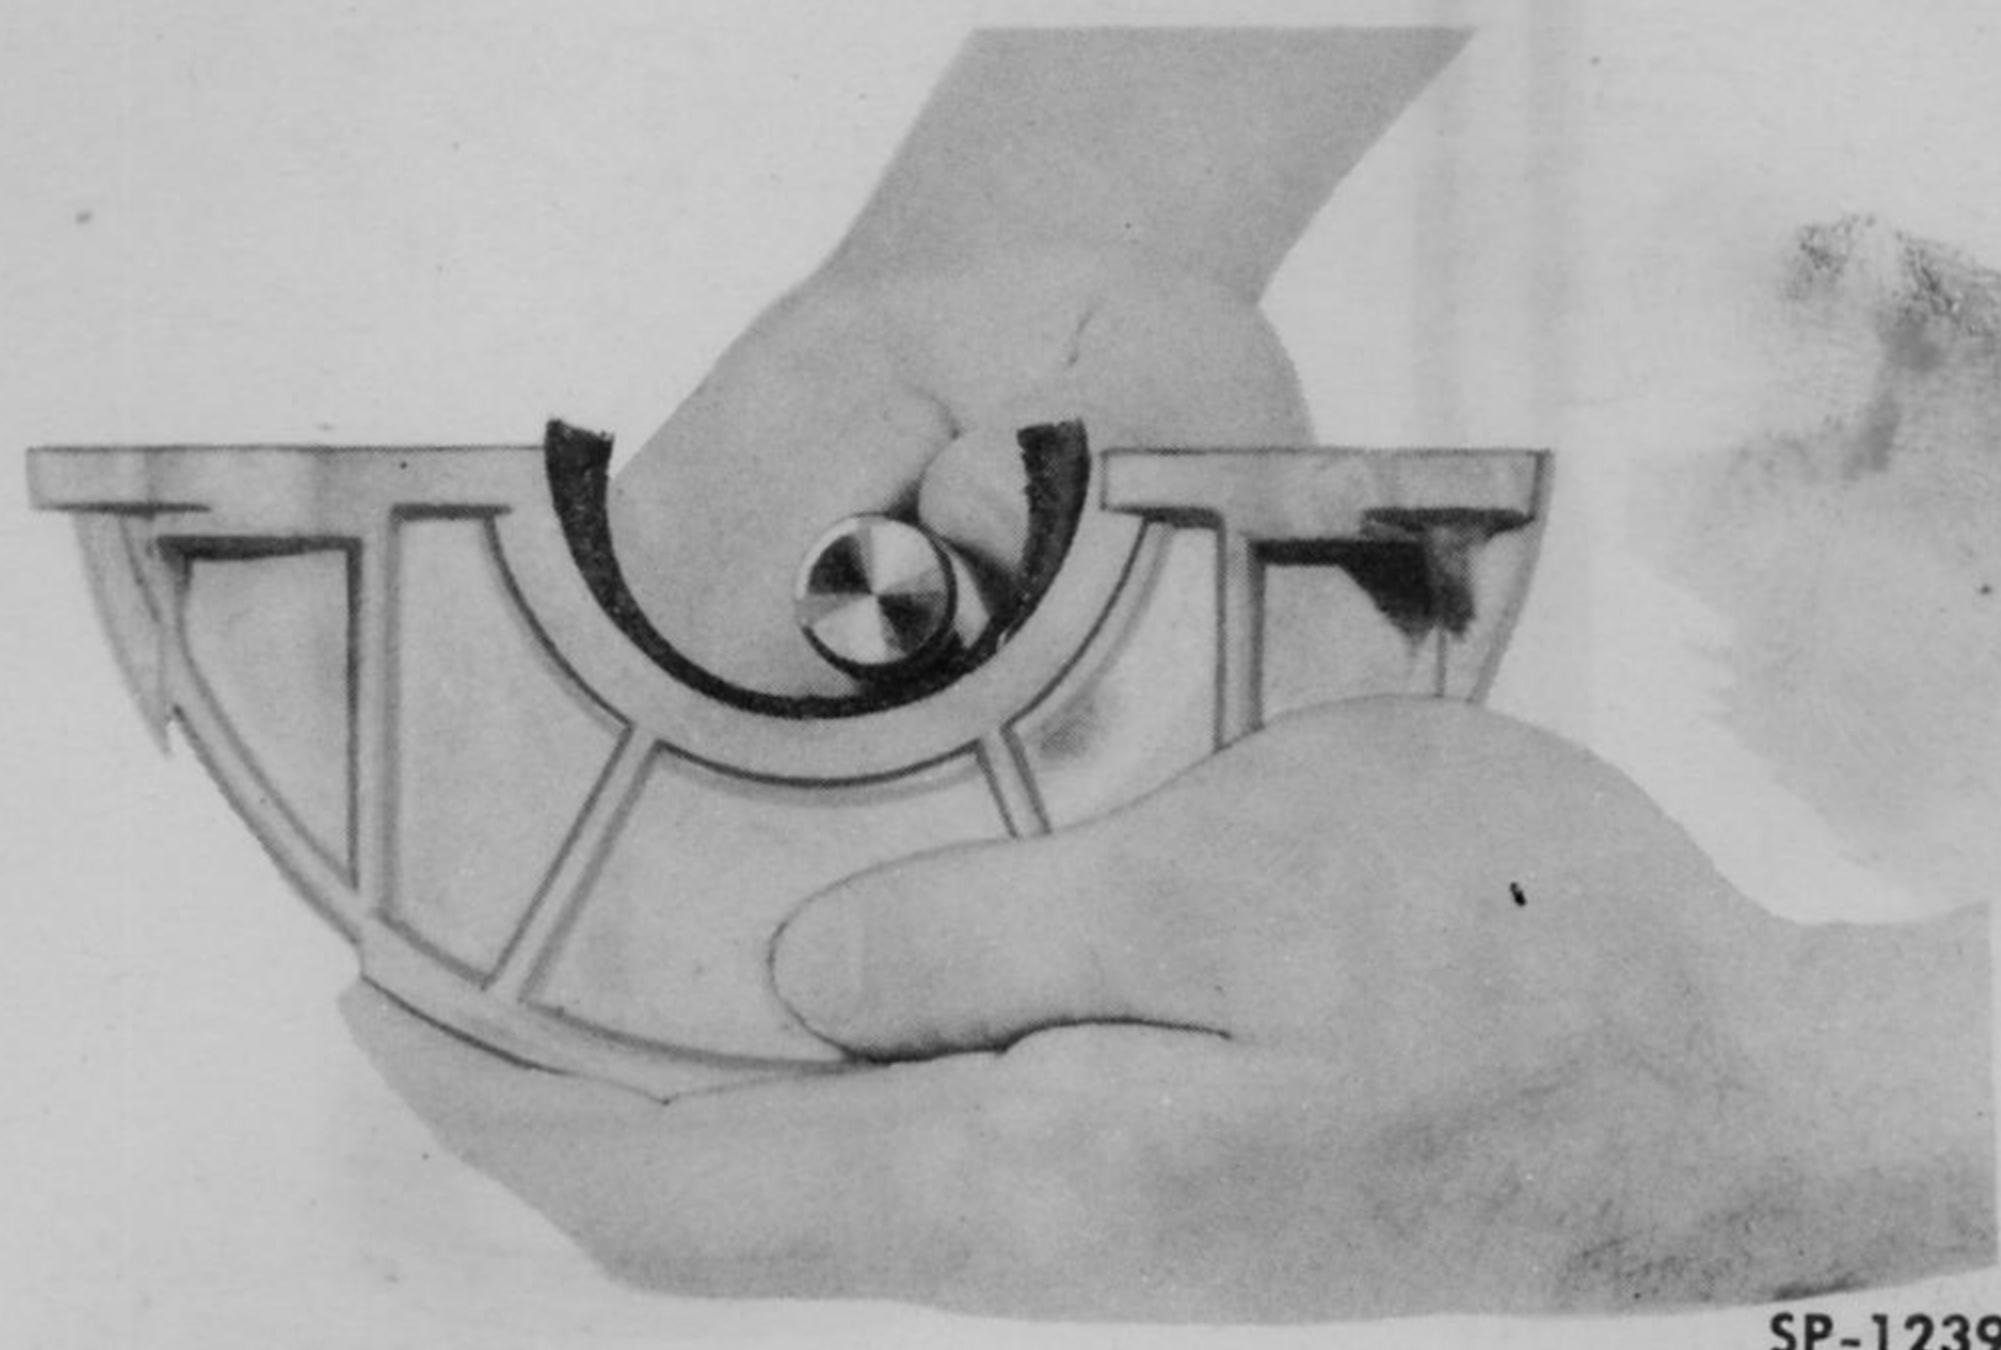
Installing Oil Seal in Crankshaft Rear Filler Block
